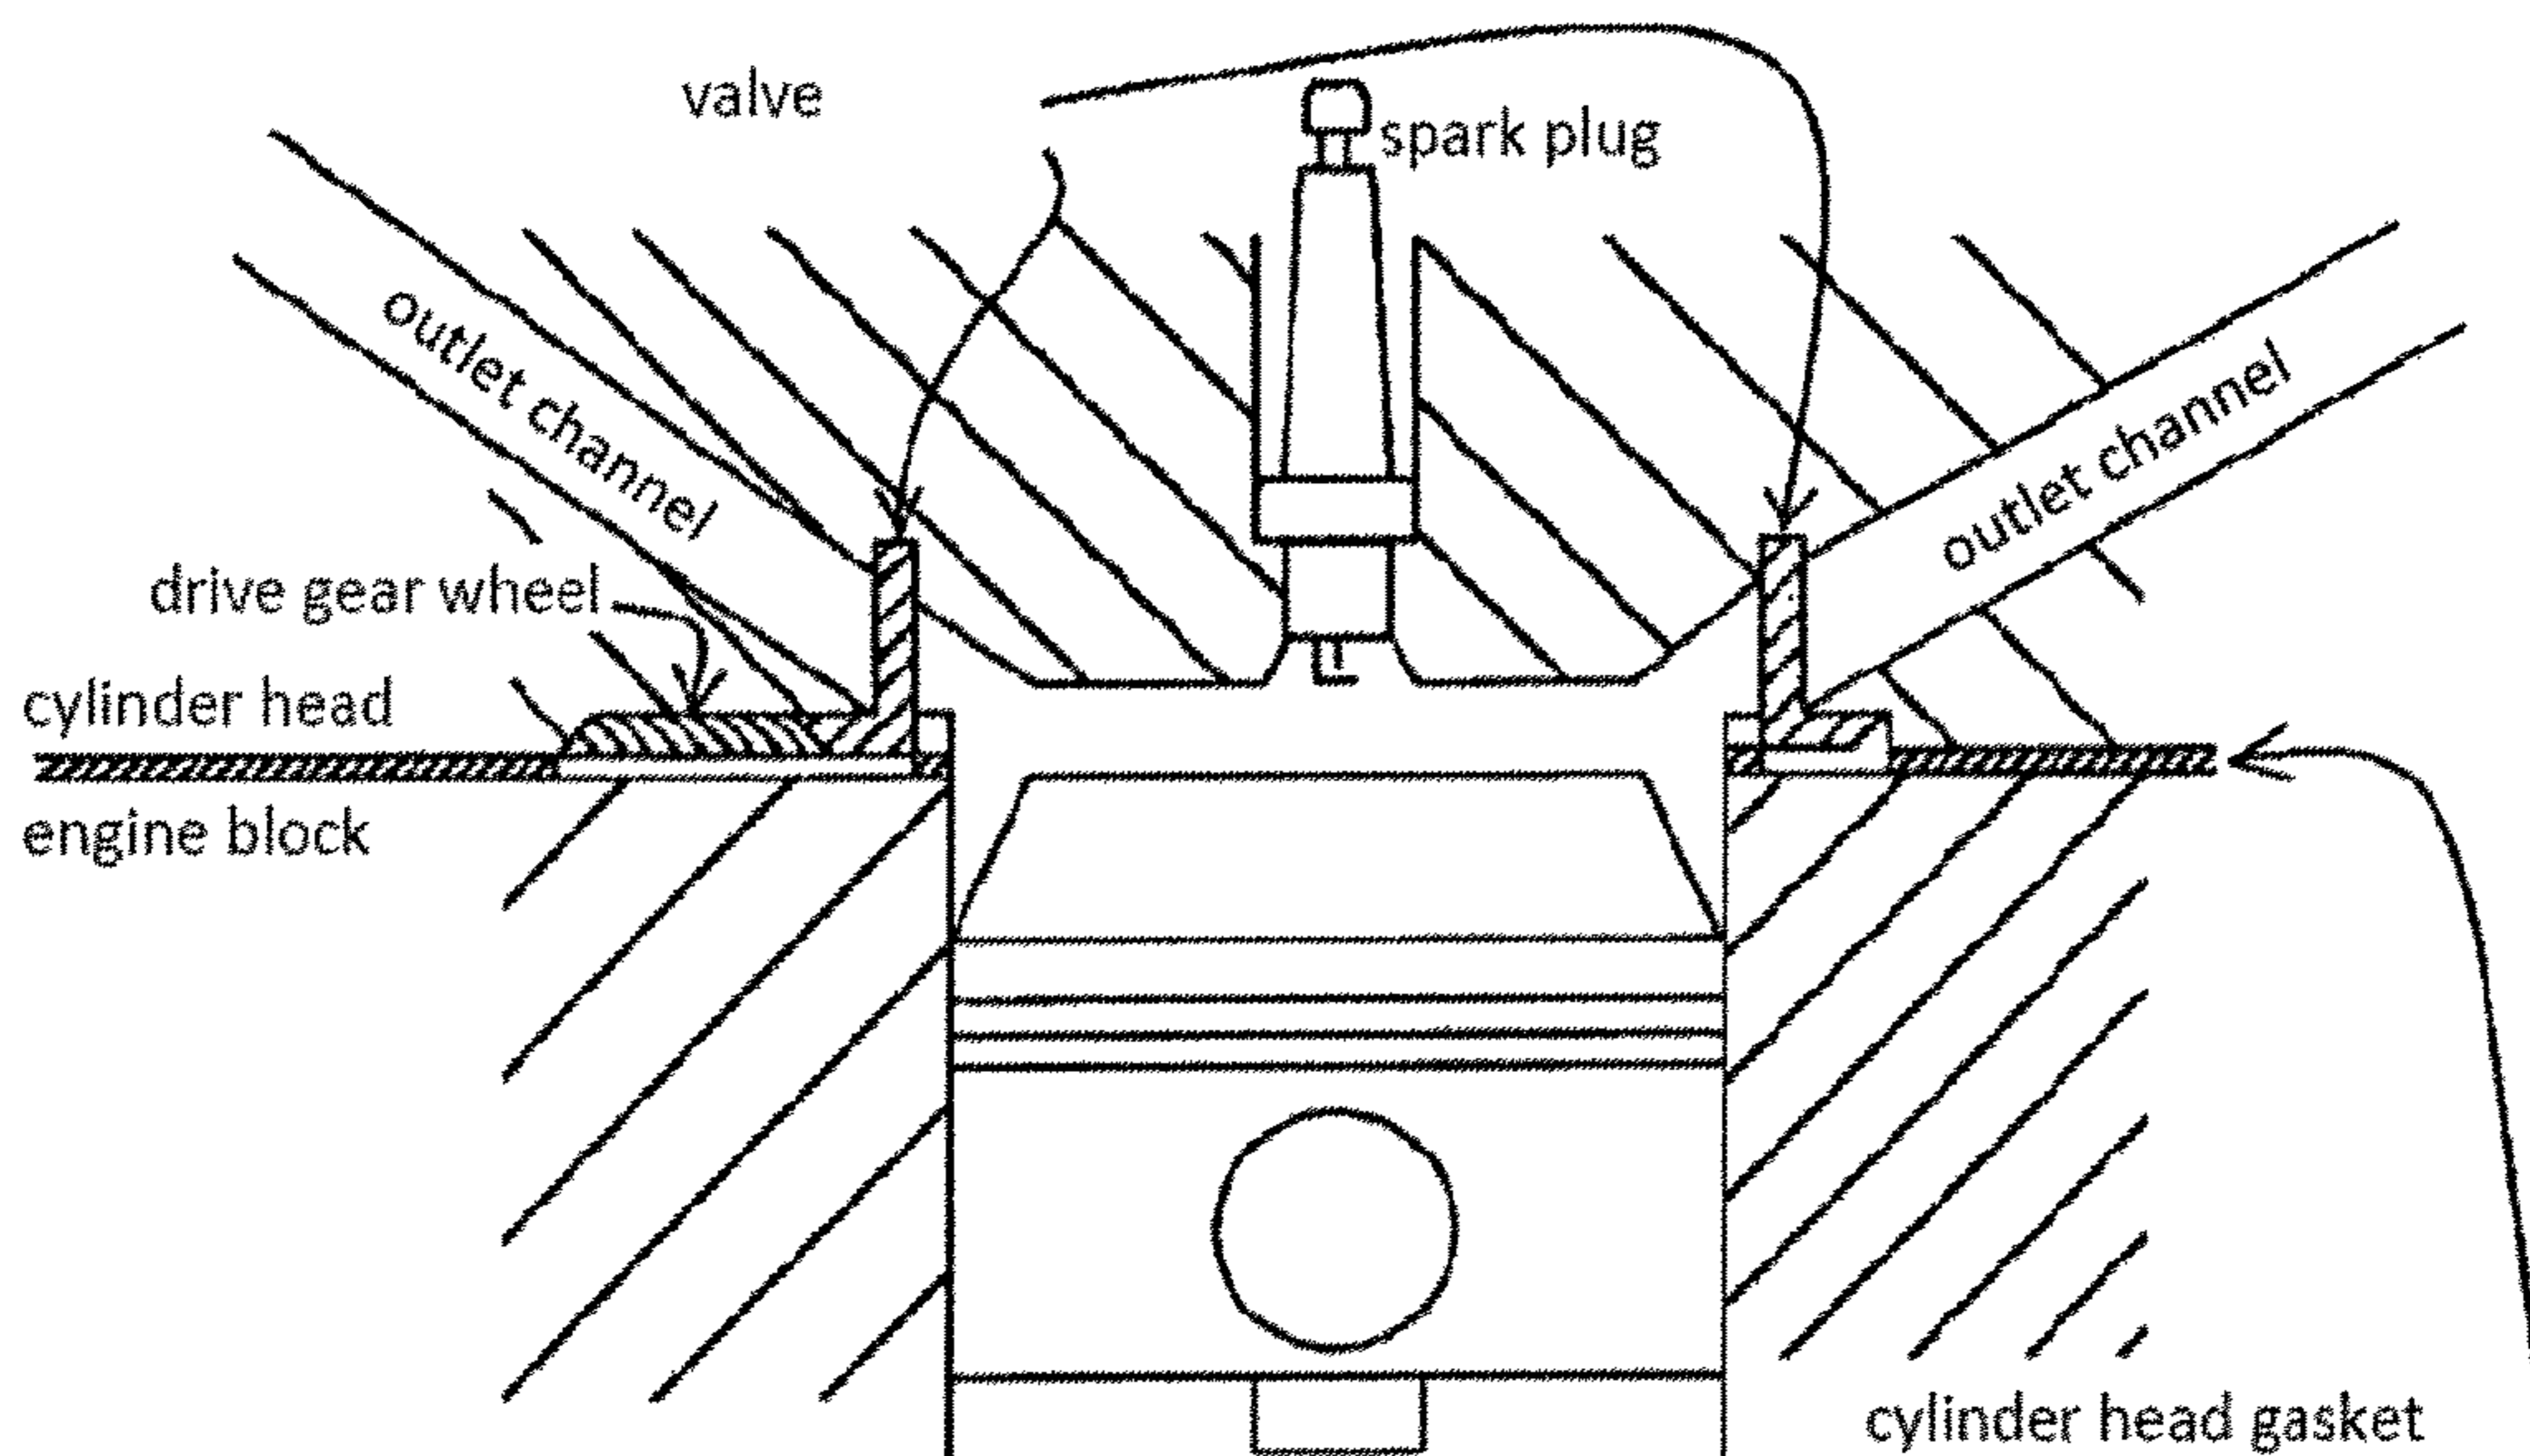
Cross-section of a four-stroke engine with an upper rotary valve
